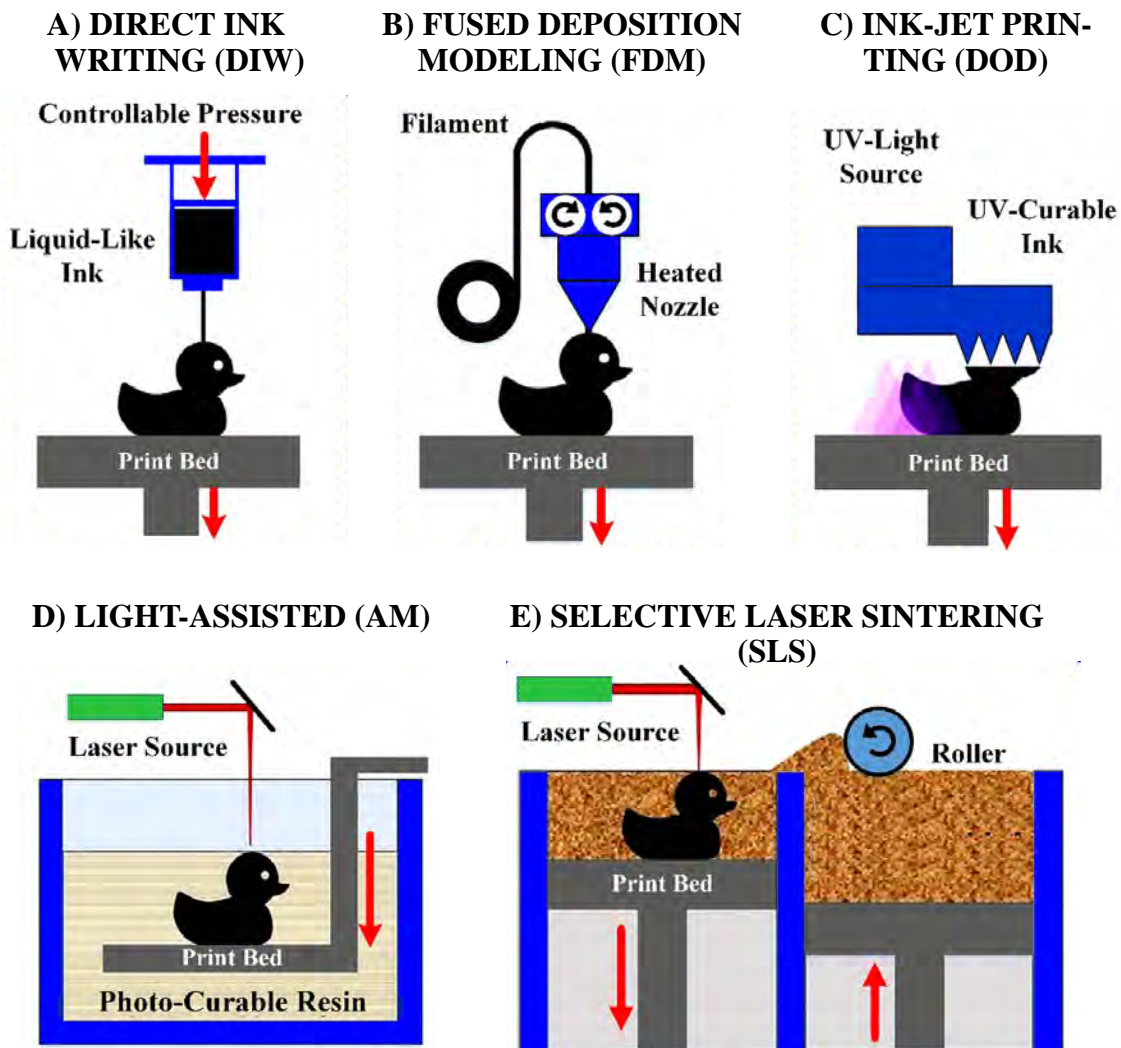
4D printing strategies for MREs, adapted from [115]. A) Direct Ink Writing (DIW), B) Fused Deposition Modeling (FDM), C) Inkjet, D) Light-assisted Additive Manufacturing, and E) Selective Laser Sintering (SLS).
